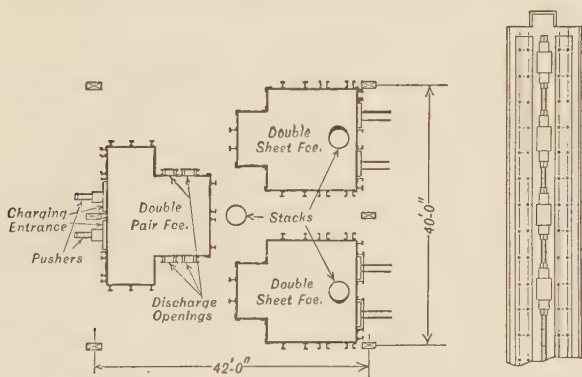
Arrangement of sheet and pair furnaces with relation to mill.
